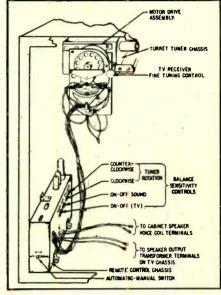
The remote-control chassis and turret tuner motor drive for the Zenith "Flash-Matic" system are shown here.
